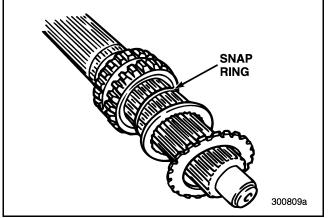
Removing Second Speed Gear Externaland Internal-Toothed Thrust Washers
